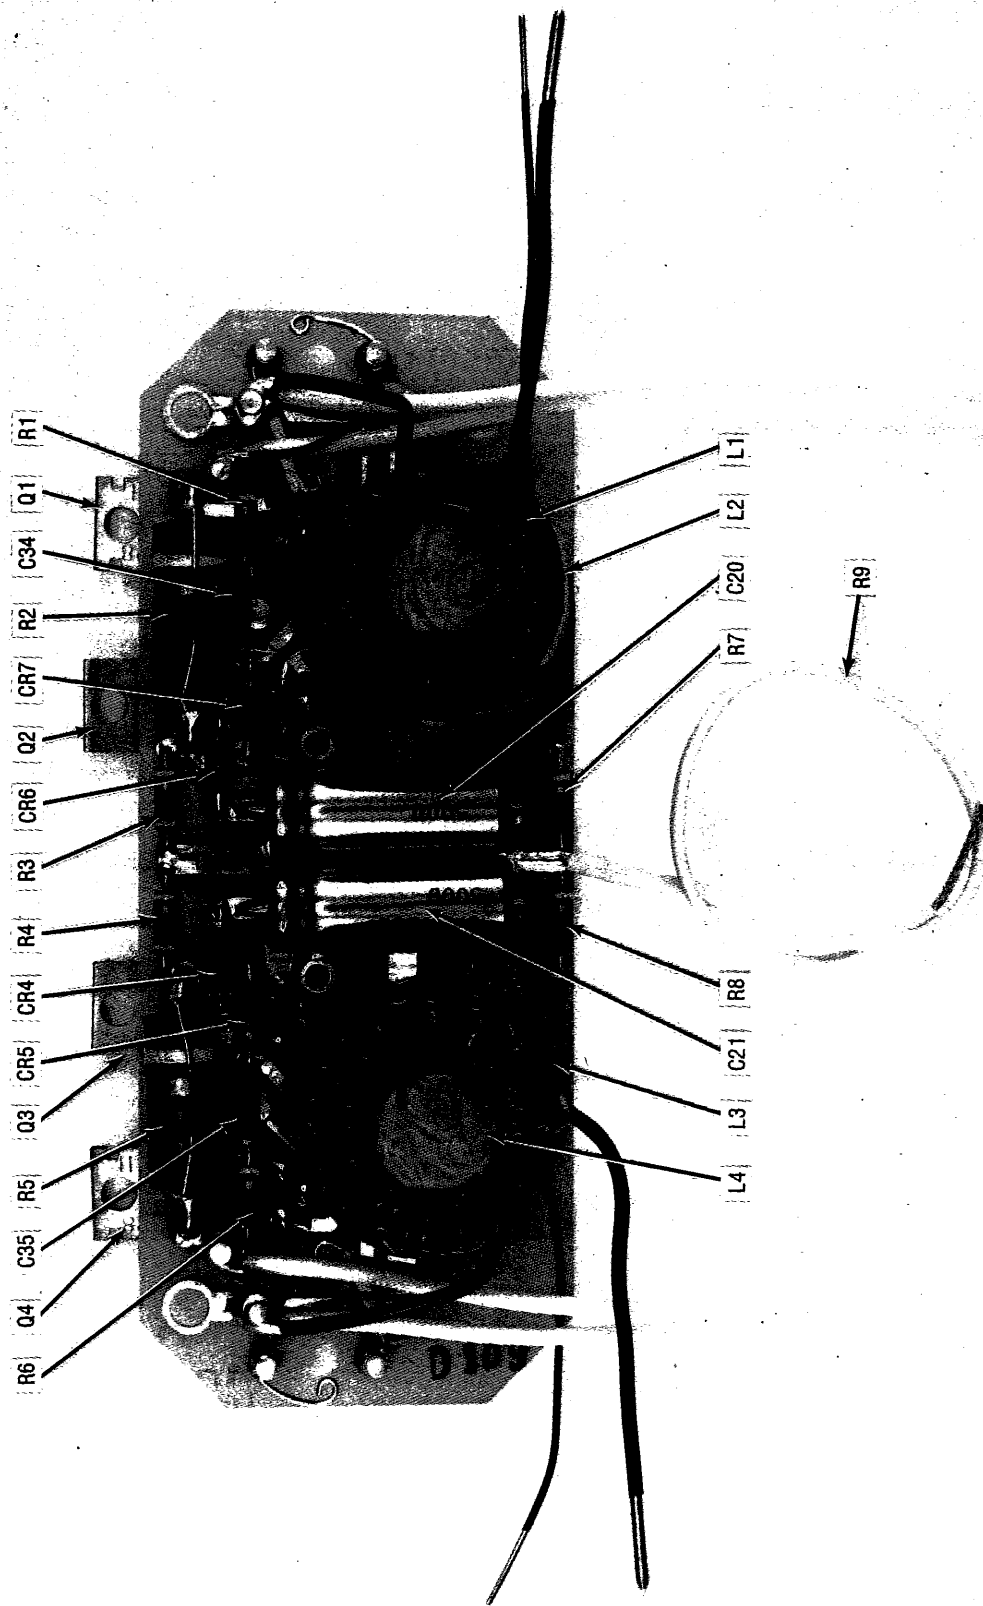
Converter PWB Assembly Parts Location Diagram
